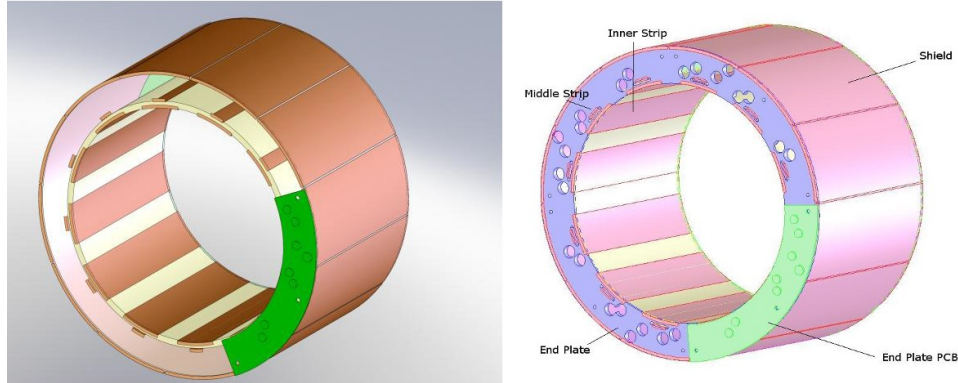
3D CAD representation of the constructed dual tuned head coil.
